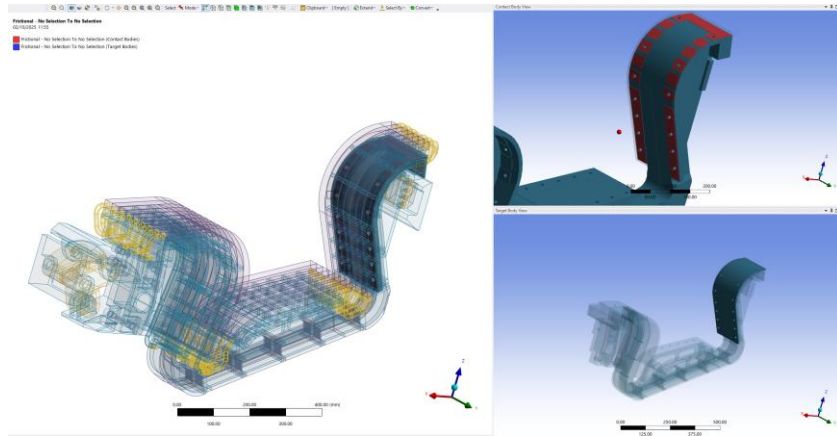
Frictional contacts between IVT back plate and IVT flanges (as shown in figure the connection is faceted type)
